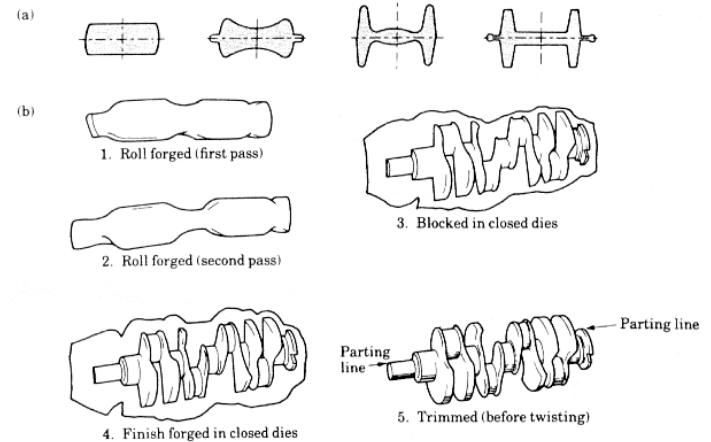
Intermediate stages in forging two different parts. (a) H-section. (b) Crankshaft. These intermediate stages are important for distributing the material and filling the die cavities properly. Crankshafts are also made by casting processes, as shown in Fig. 5.39.
